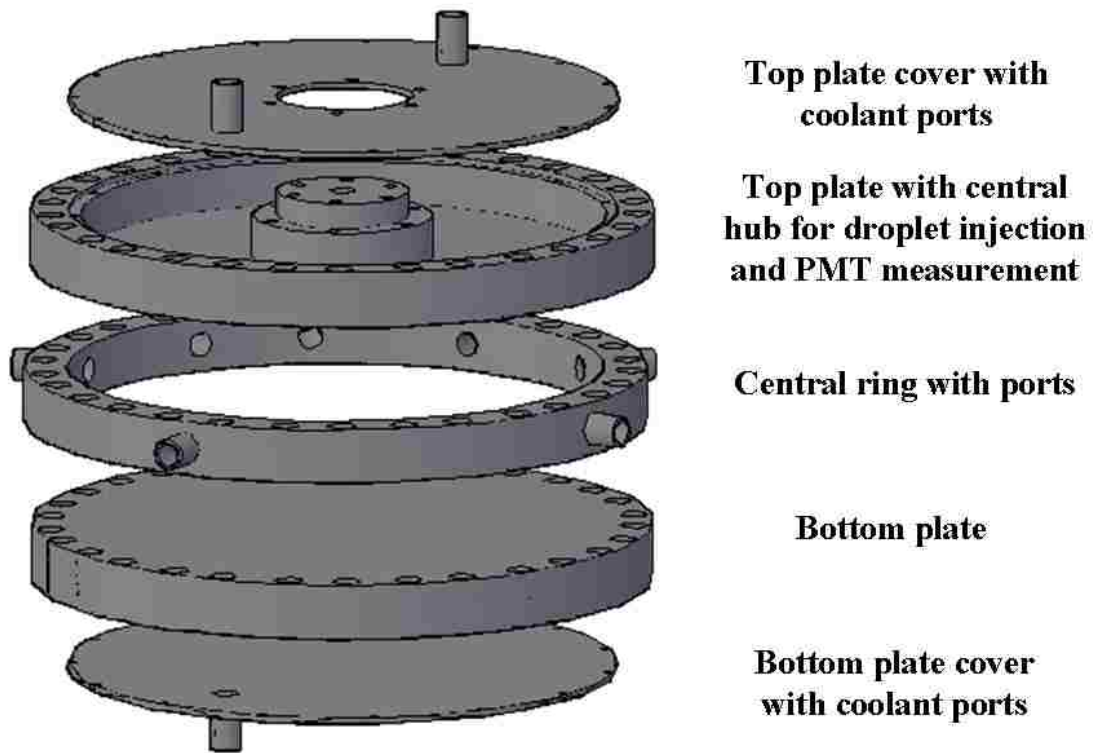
Expanded 3D view of the components of the thermal diffusion cloud chamber.
